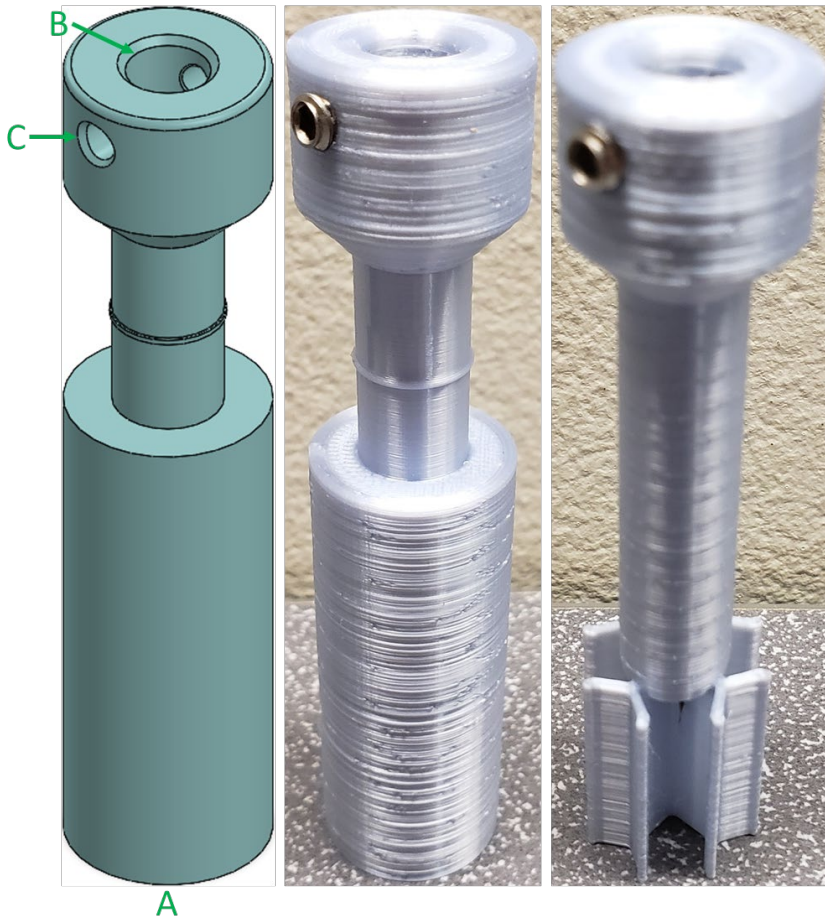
CAD of the version 2 cylinder end effector, a 3D printed prototype, and an alternate vane geometry with 8 vanes. This part is approximately 3.5” tall with a diameter of about 0.8”.
